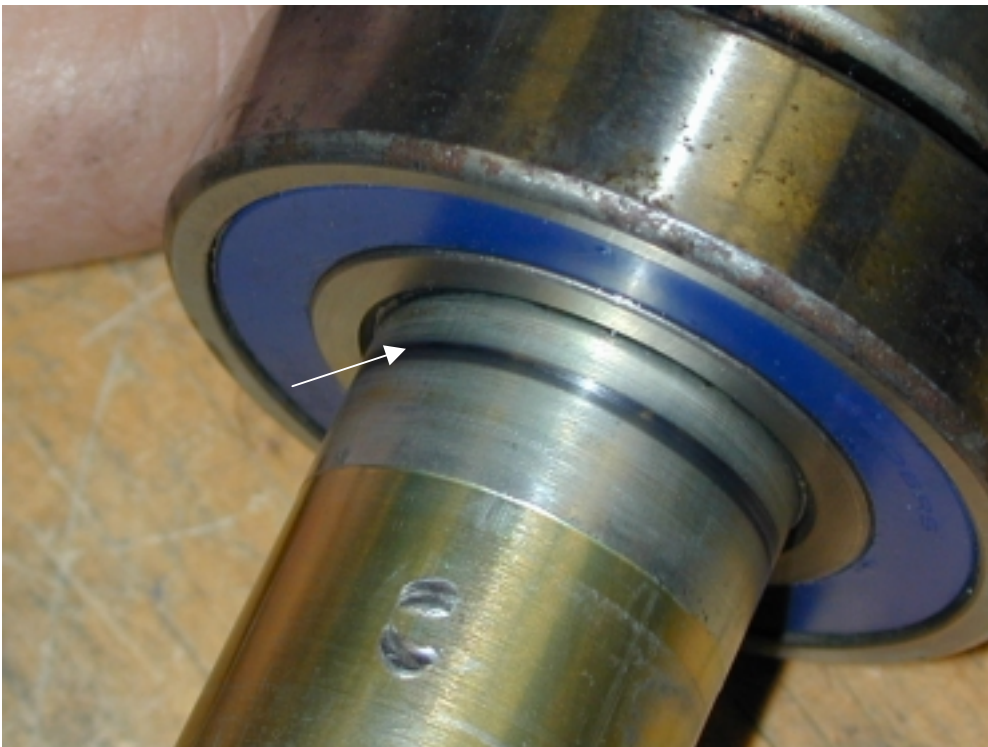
Close-up of the lower yaw bearing. The shining track under the yaw bearing is caused by the bearing seal.
